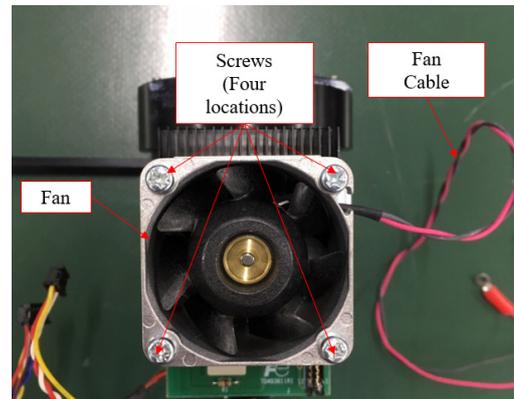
Remove the screws (four screws) that fix the fan with the screwdriver.
